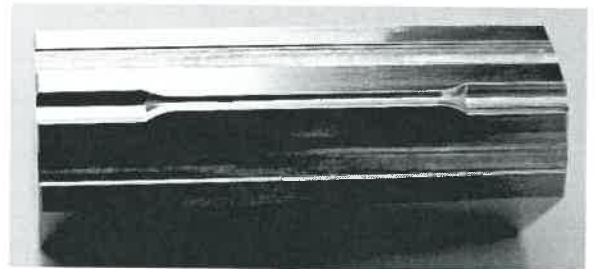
Hard milled mold of hardened cold working steel (60 HRC) for micro rotary swaging of thin wires
